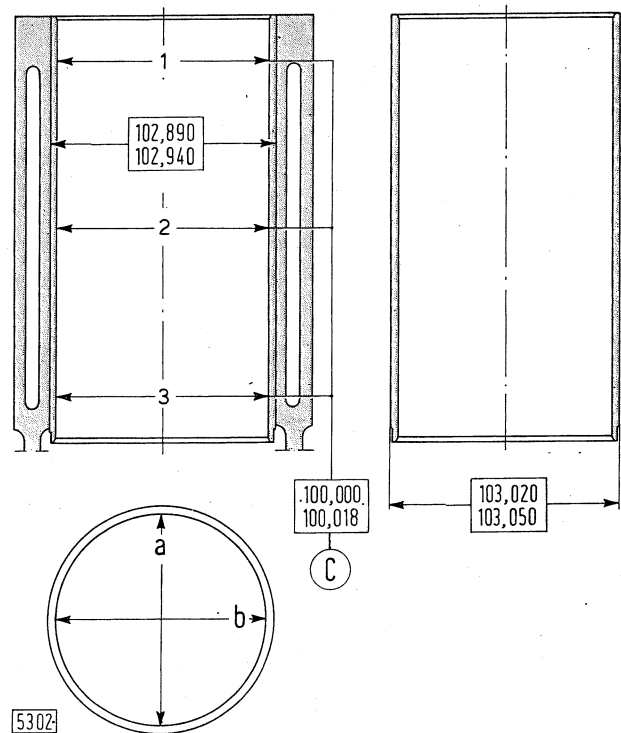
Standard liner and crankcase bore dimensions (mm - See conversions in Section VIII). a-b. Liner measuring locations. - C. Final dimension after press-fitting-1,2 and 3. Bore measuring planes.
